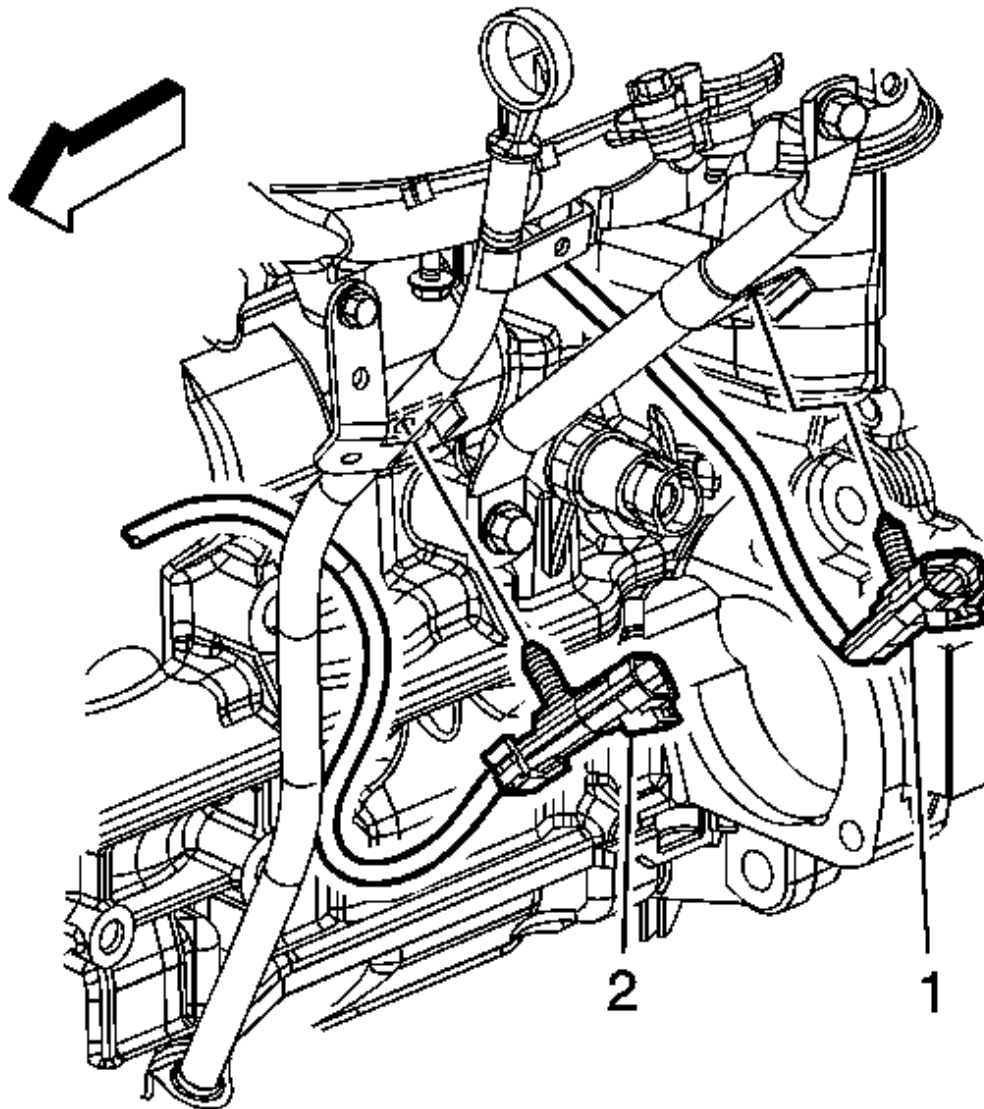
Identifying Front & Rear Knock Sensor Clips
